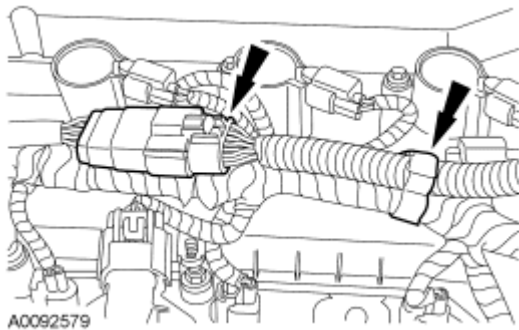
Locating Fuel Charging Wiring Harness Electrical Connector And Harness Retainer
